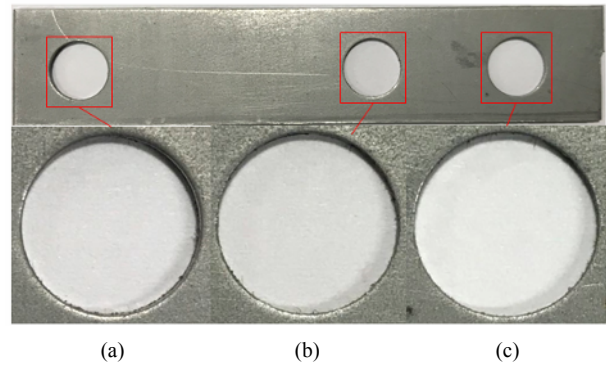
Sheet specimen condition after punching test with additive and comparative punch: (a) Holes shape by additive punch; (b) and (c) holes shape by comparative punch.
